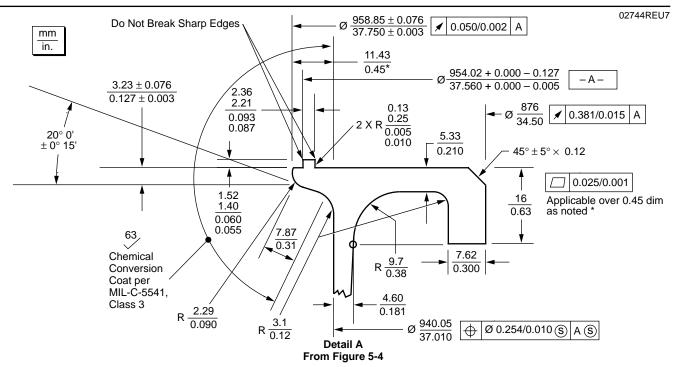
3712B PAF Detailed Dimensions (Download Figure)
